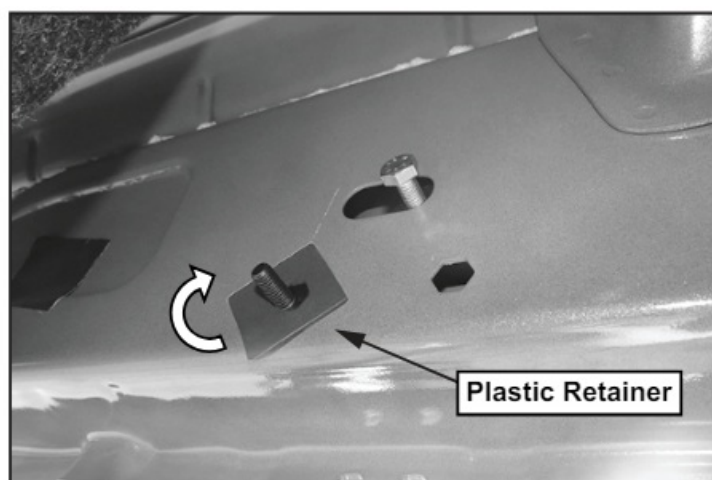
8mm Bolt Plate. NOTE: Bolt Plate is not required on models with threaded inserts
